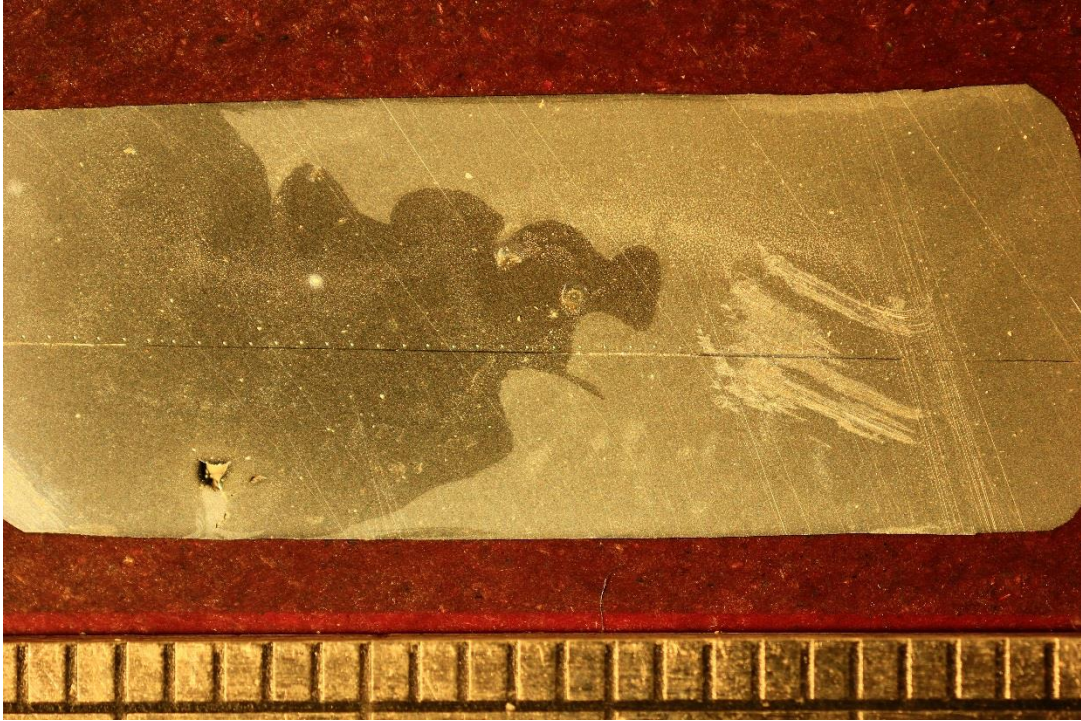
Macrograph of Weld 4 Sample 9
